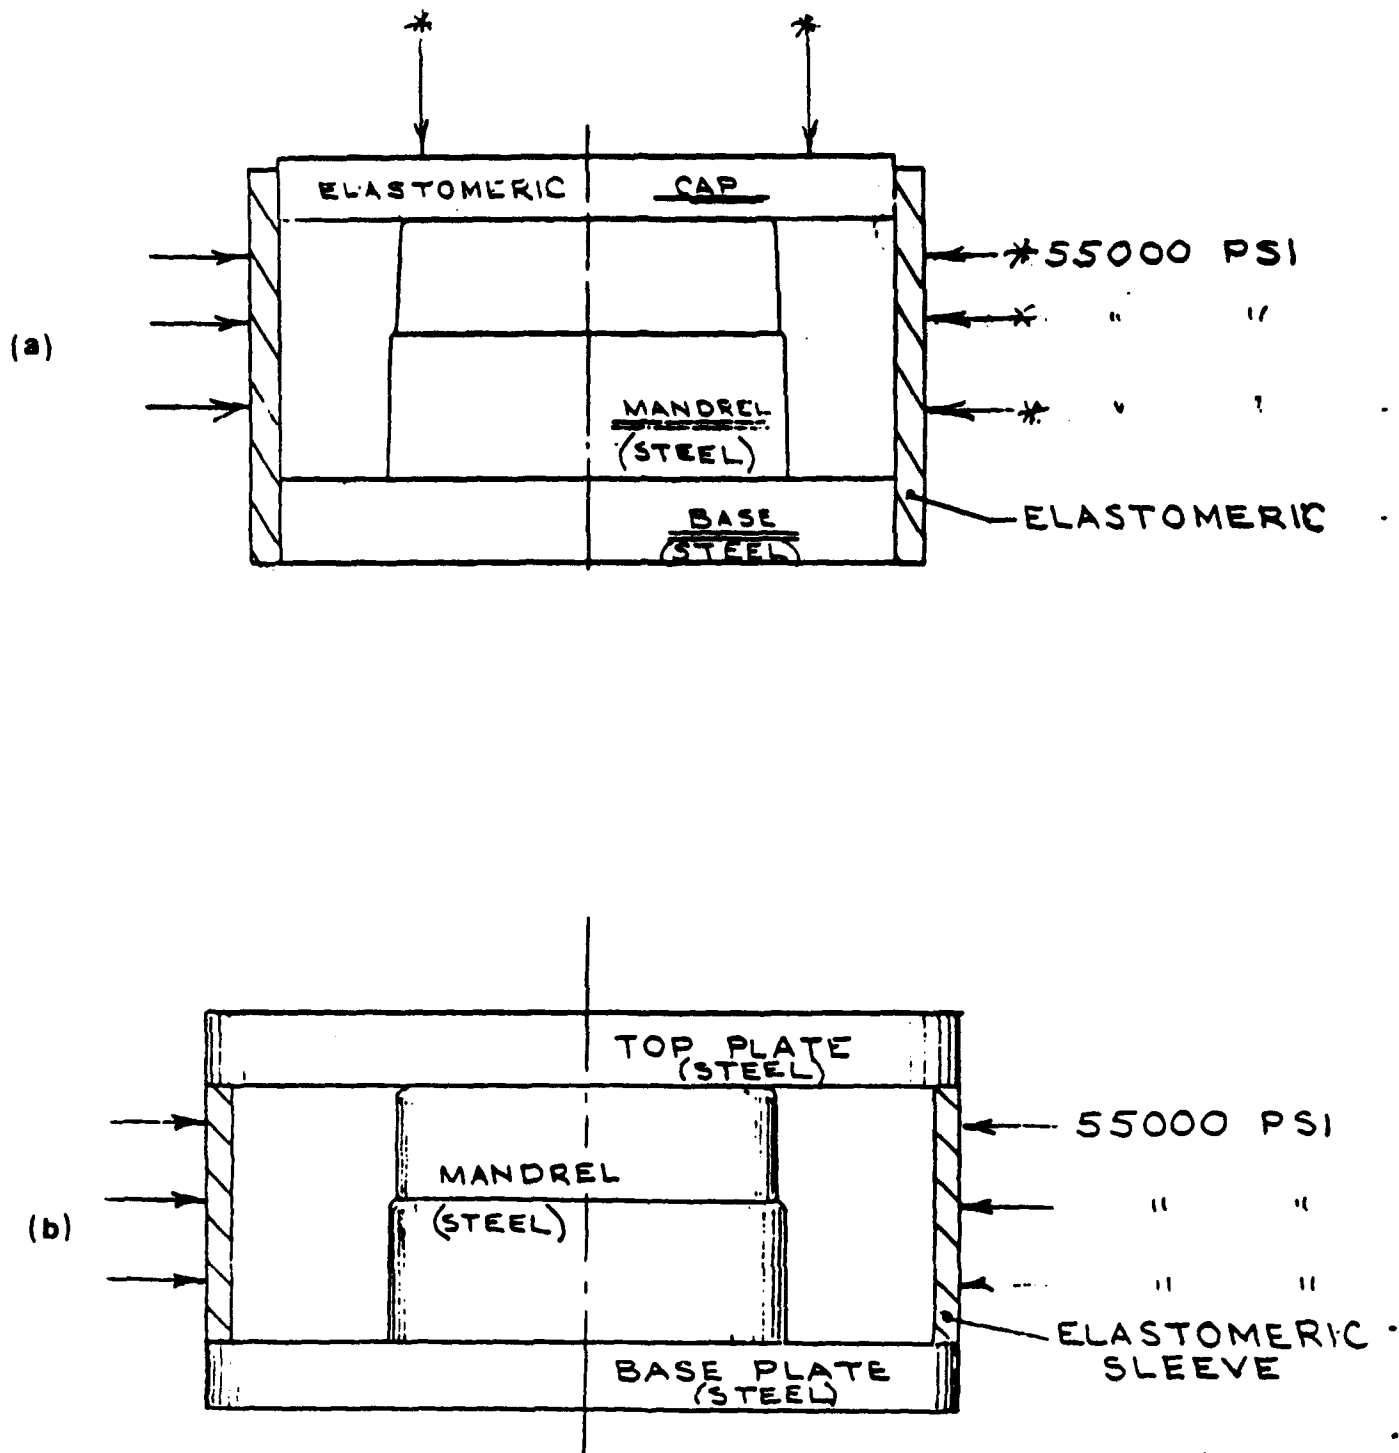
CONCEPTUAL SKETCH OF TOOL DESIGNS COMPARING
